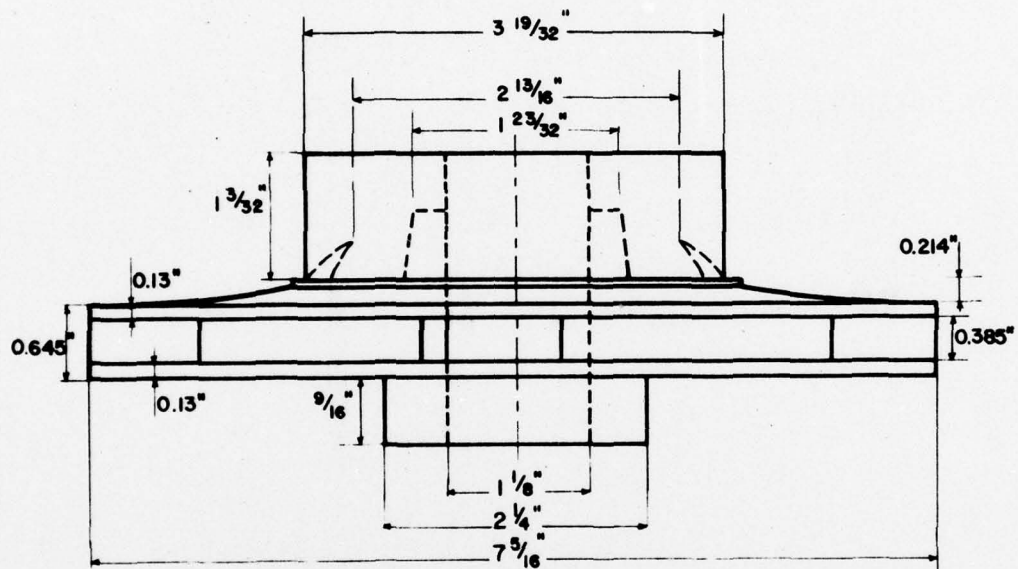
BRONZE-IMPELLER DESIGN
